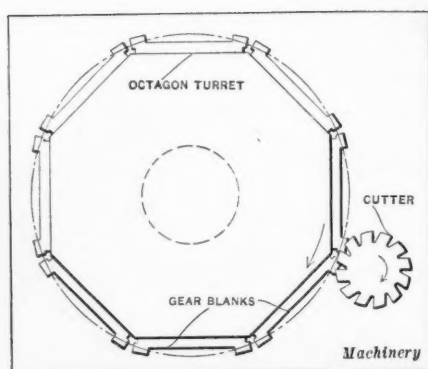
Diagram showing Octagon Turret and how Ring Gears are presented to Cutter
